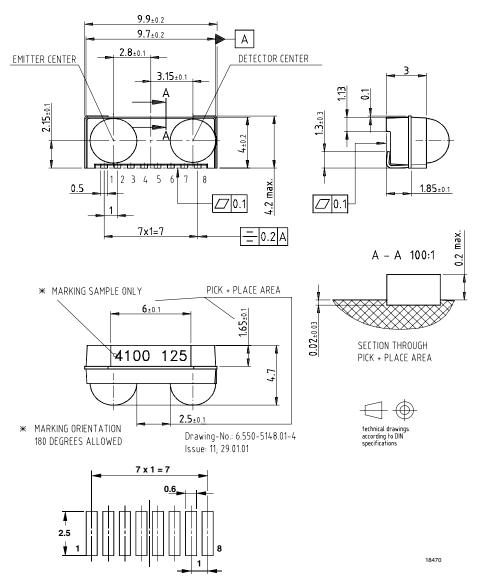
Package Drawing TFDU4101. Tolerance ± 0.2 mm if not otherwise mentioned
